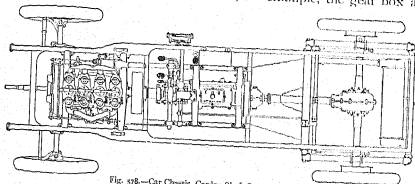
Car Chassis, Cardan Shaft System (plan)
